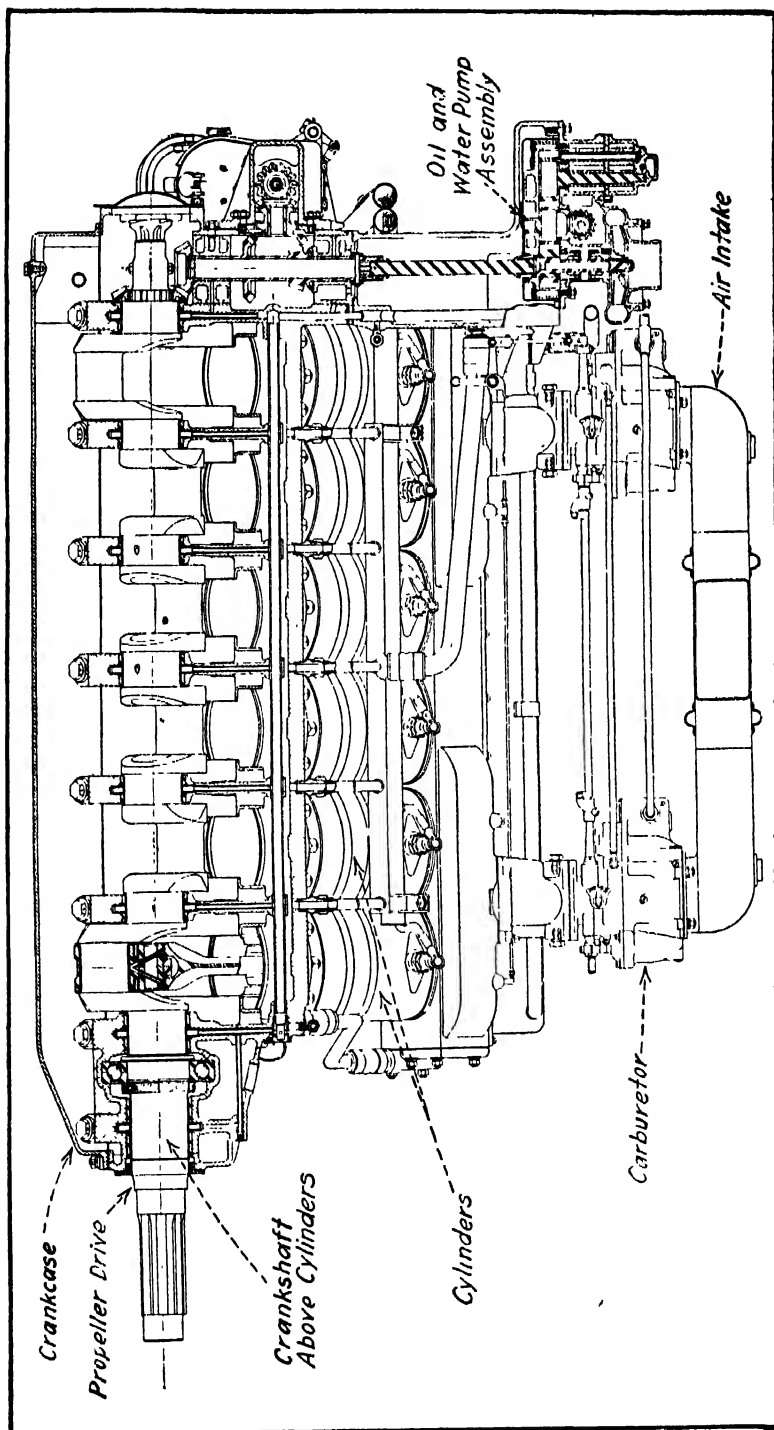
Longitudinal Section Through Packard Aircraft Engine Model 2A 1500 Inverted.
